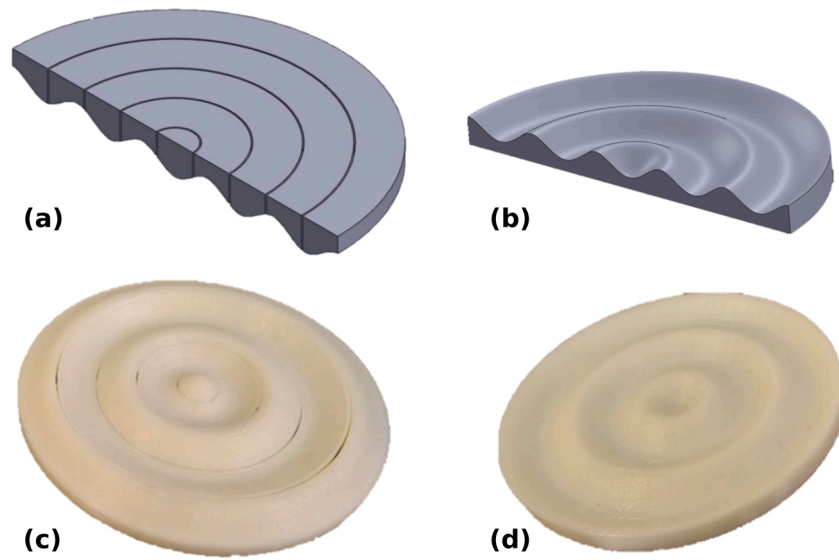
(a) CAD showing cross section through segmented male ripple tool (b) cross section through female ripple tool, (c) 3-d printed ABS segmented male ripple tool, (d) 3-d printed ABS single piece male ripple tool.
